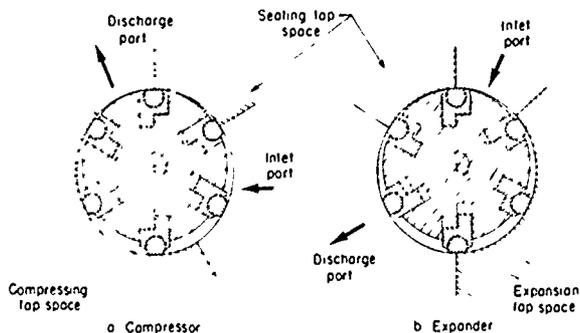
Cross Section Drawing of Pivoting Vane Pump.
